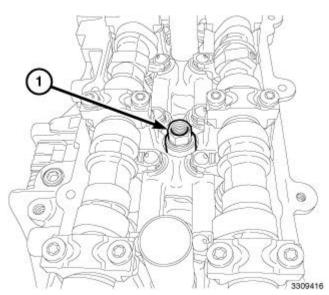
Spark Plug Tube Installer Courtesy of CHRYSLER GROUP, LLC
